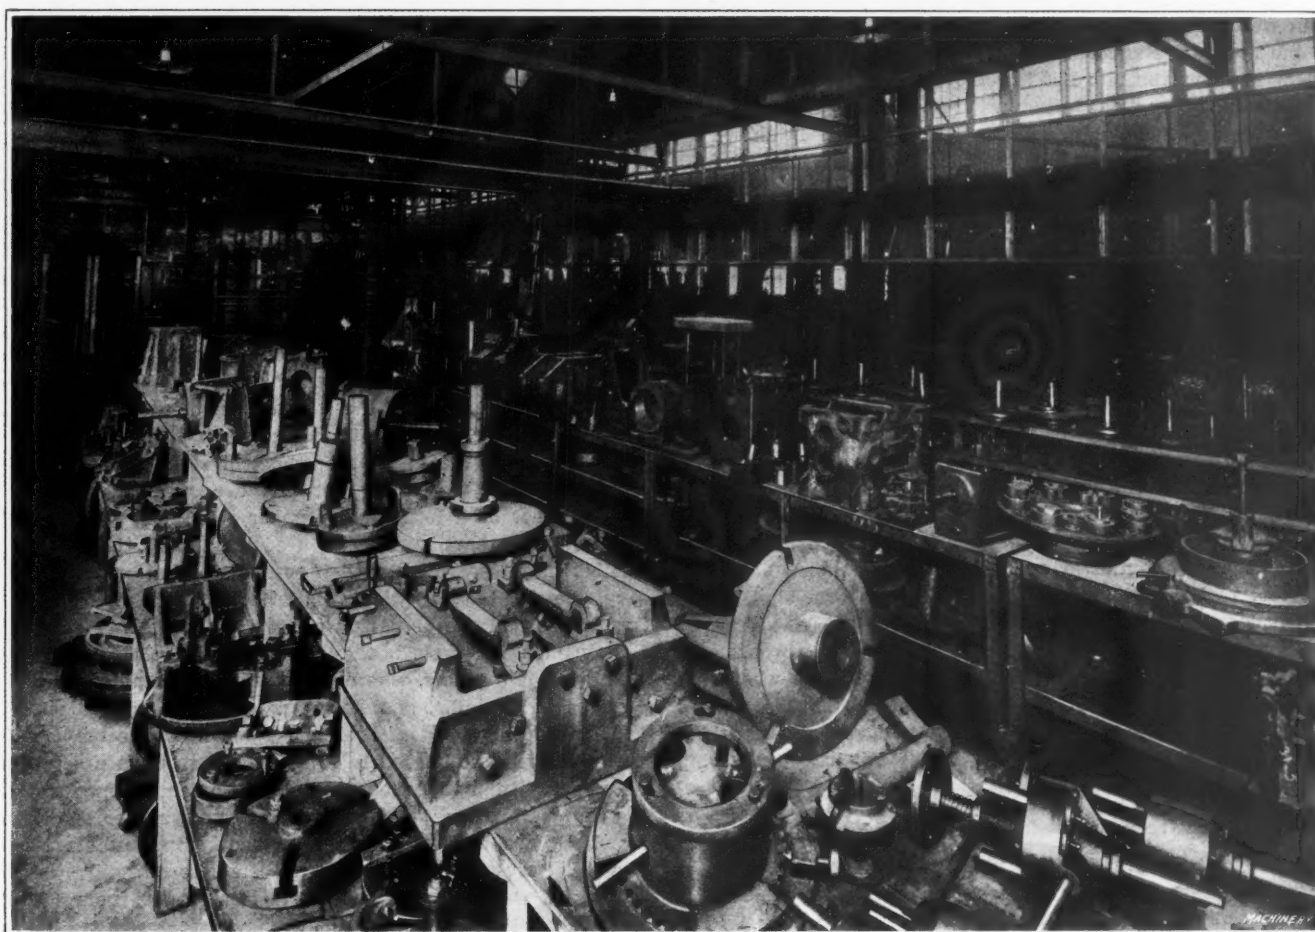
Jig and Fixture Storage Section, Gisholt Machine Co. Note Hand Power Traveling Crane for lifting and carrying Heavy Fixtures
